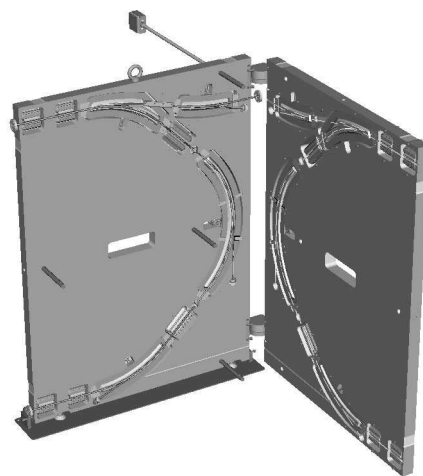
The recirculator magnets are machine out of one solid iron plate forming a door.
